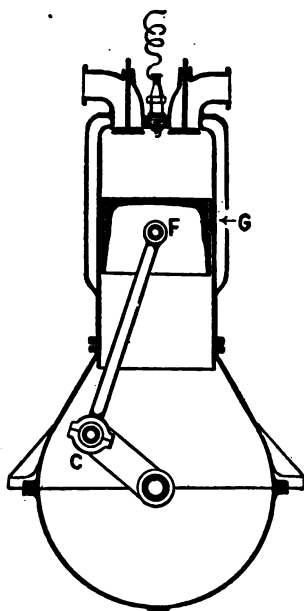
Cross Section of a One-cylinder Engine. *F*, foot of Connecting Rod. *C*, Crank Pin
